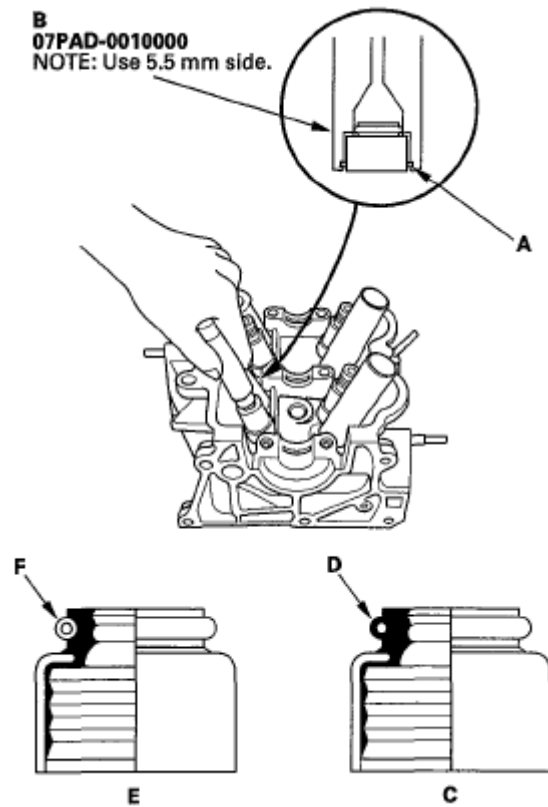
Installing Valve Seals Using Stem Seal Driver
